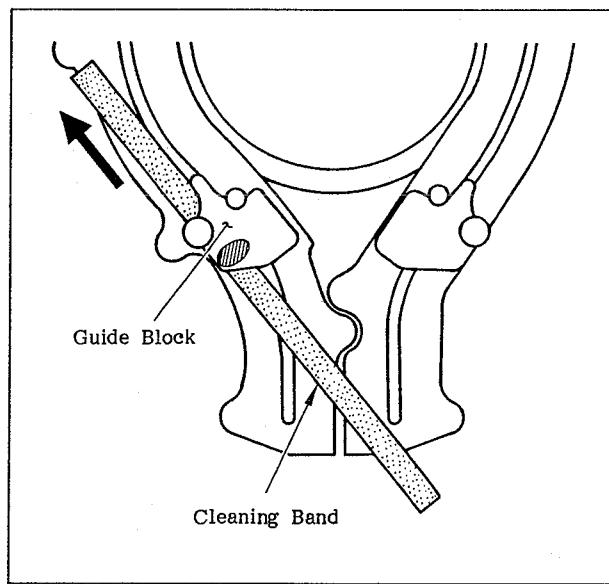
Cleaning the Slider Guide Blocks (2)
